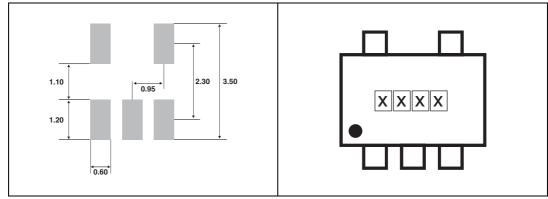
Footprint (dimensions in mm) Figure 9. Marking
